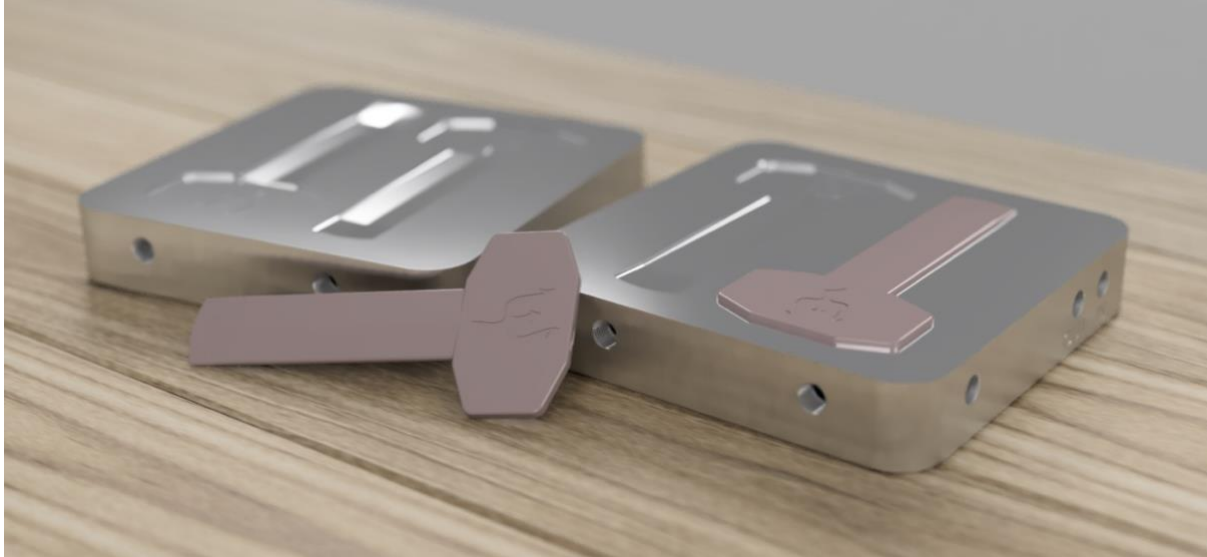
Injection mold insert machined in aluminum with ABS polymer part, Own Work. Rendered in Fusion 360.
